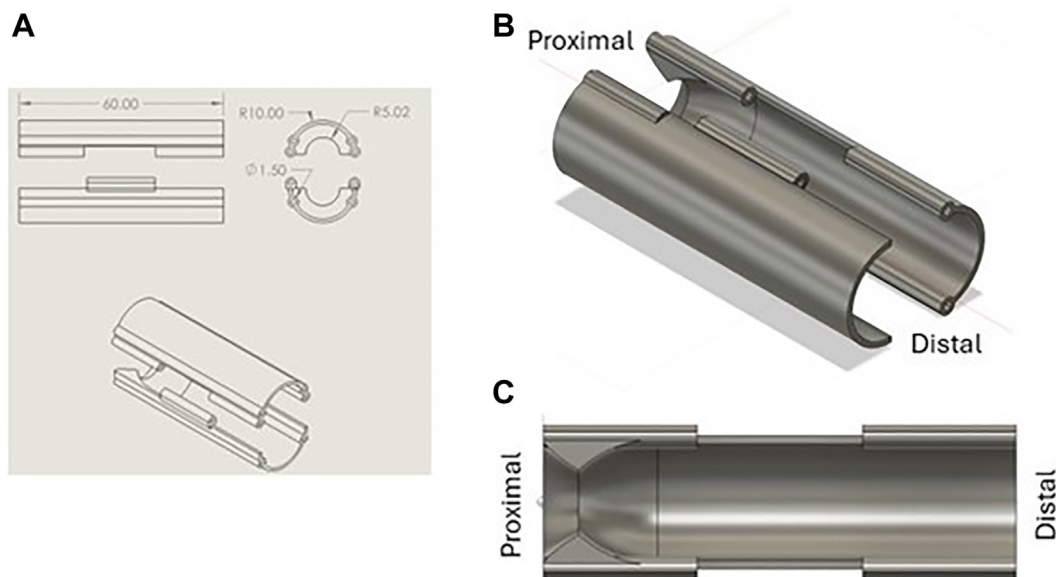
(A) Technical drawing and three-dimensional model of the device in (B) isometric and (C) cross sectional views.
